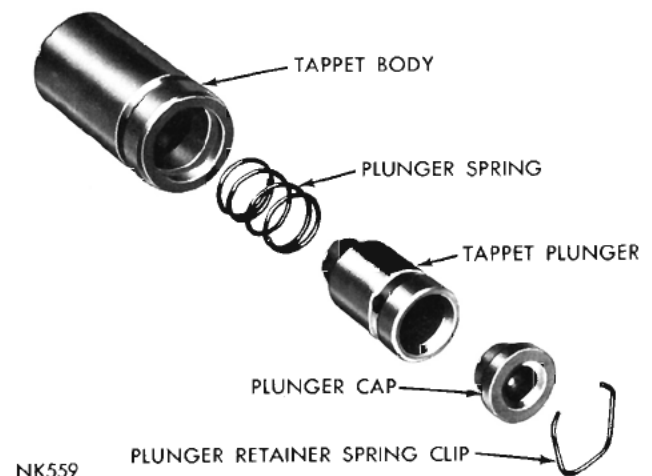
Hydraulic Tappet Assembly (Disassembled View)
